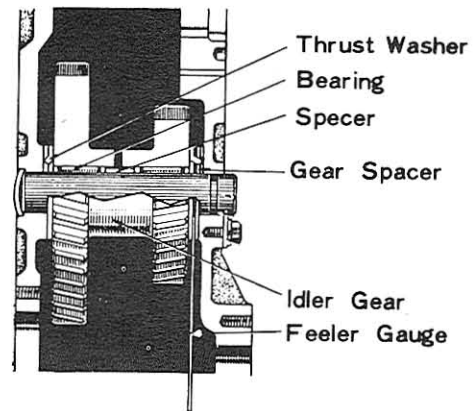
Transfer Idler Gear Thrust Clearance G2391
